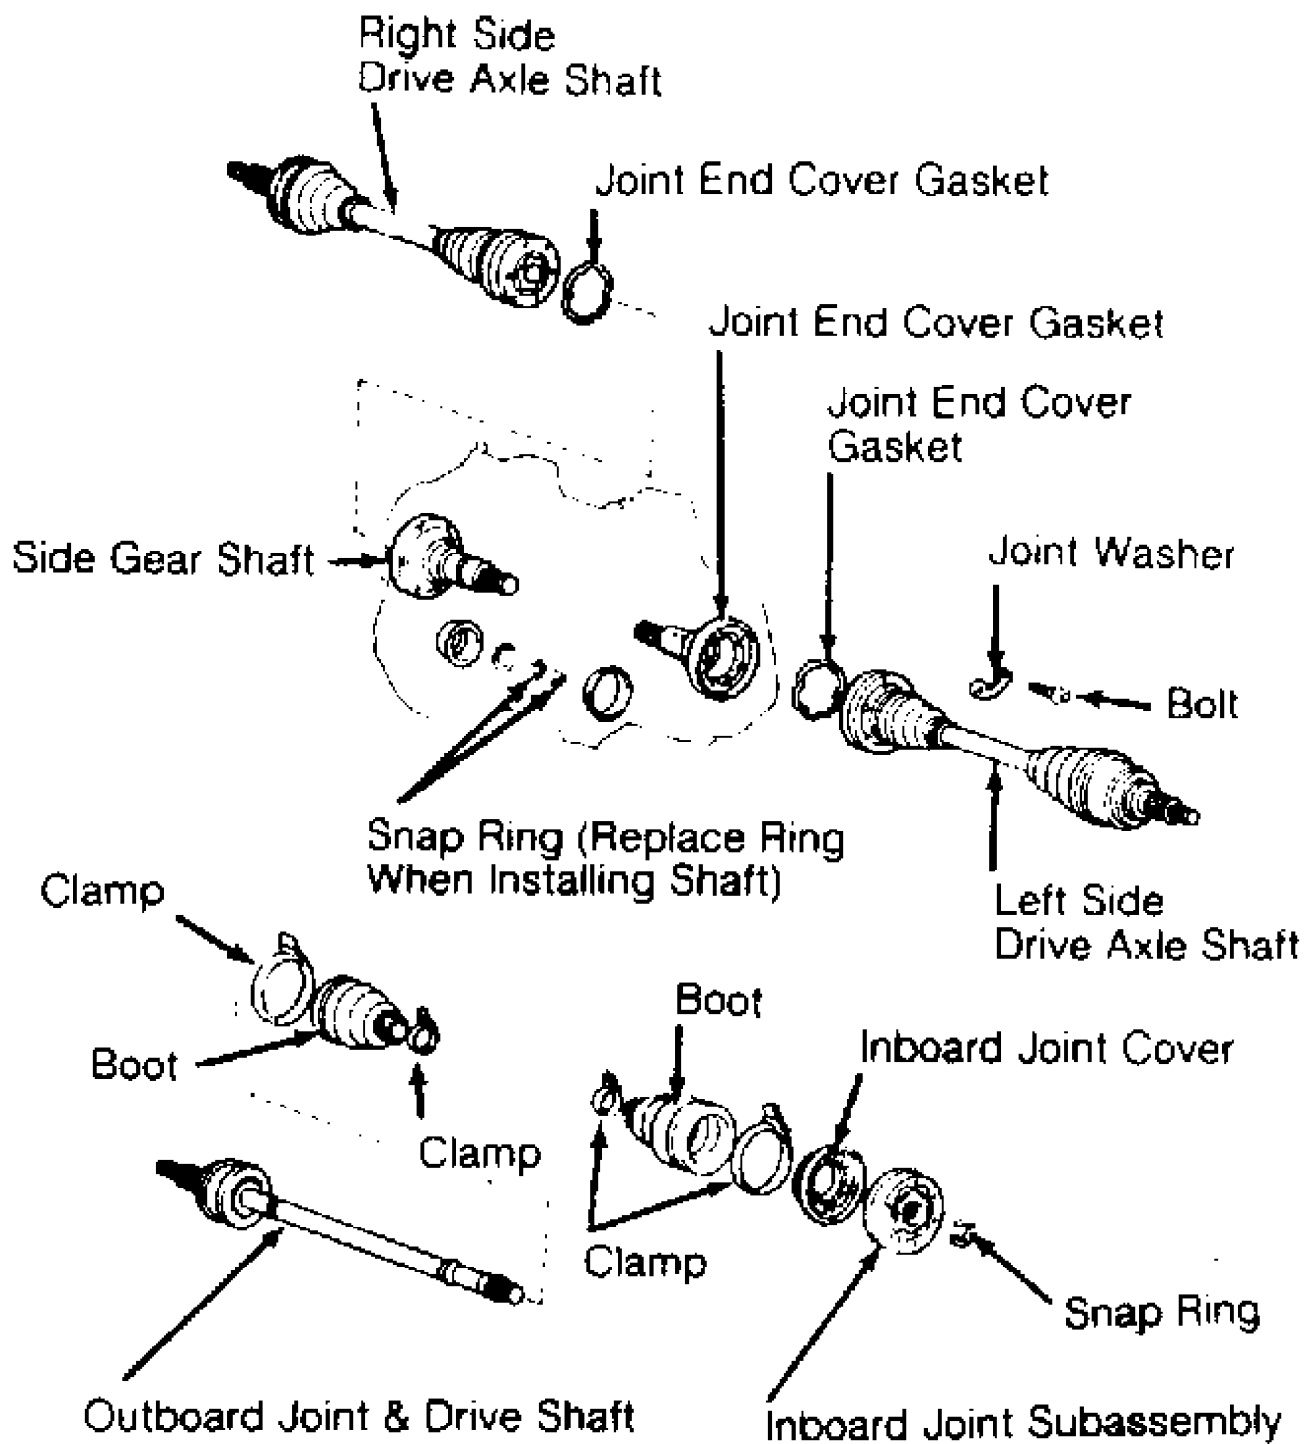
Exploded View of Camry All-Trac Drive Axle Shafts
